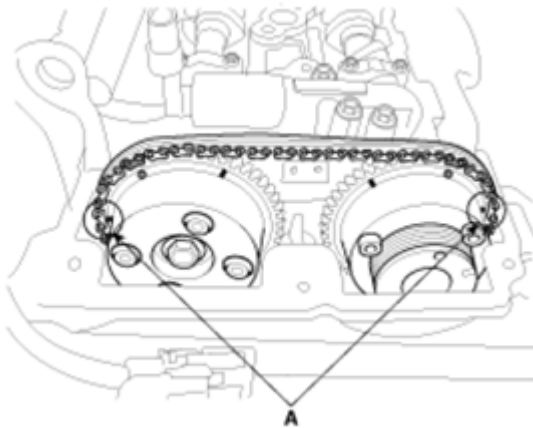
Identifying Crankshaft Sprocket And Camshaft Sprocket Timing Marks
